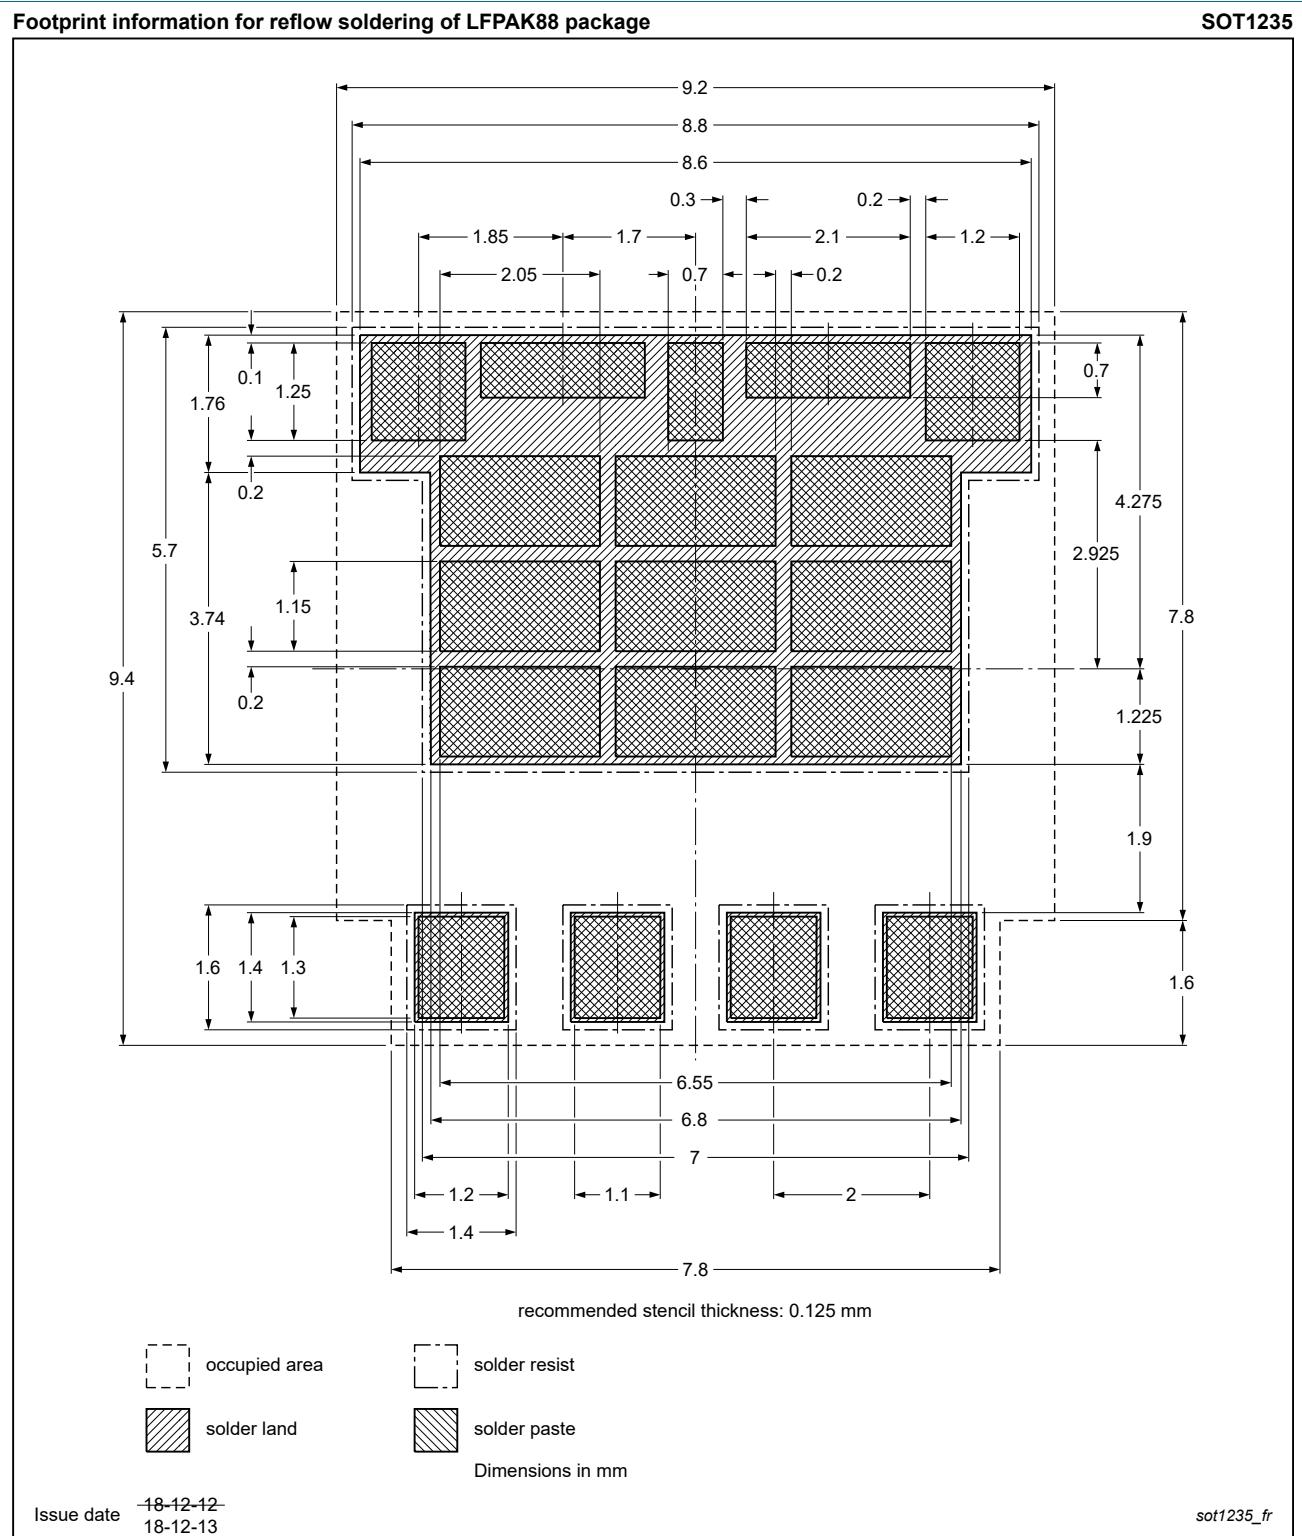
Reflow soldering footprint for LFPAK88 (SOT1235)
